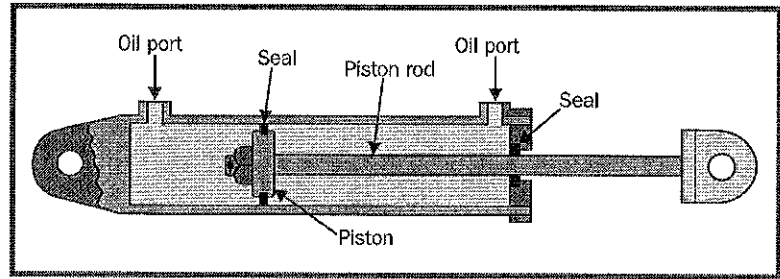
Primary parts of a typical hydraulic cylinder.
